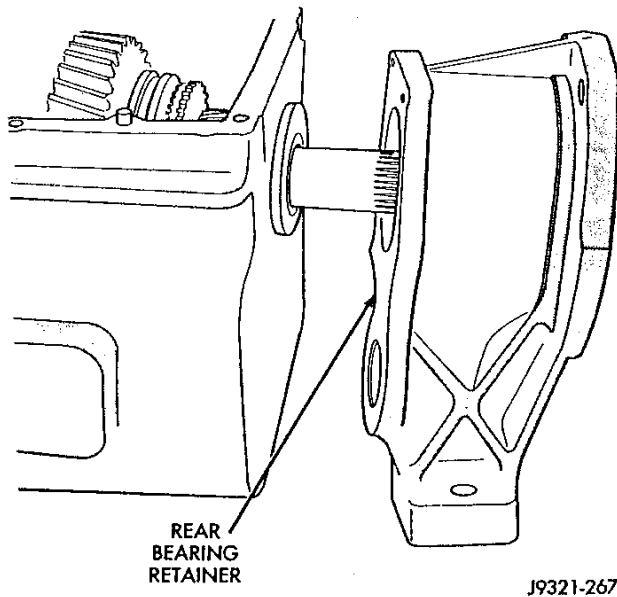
Four Wheel Drive Rear Bearing Retainer Removal
